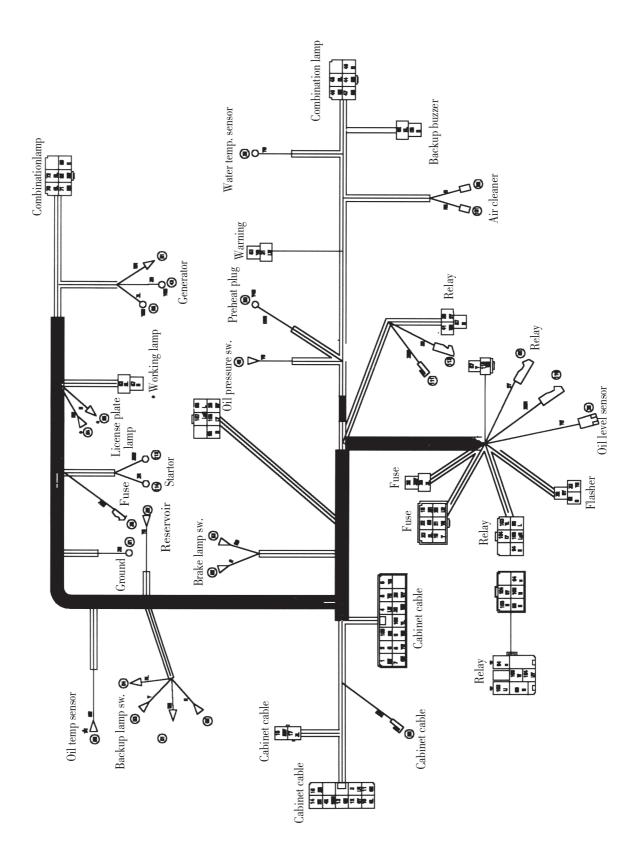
Engine wire harness. CPCD80-100-W -35-
